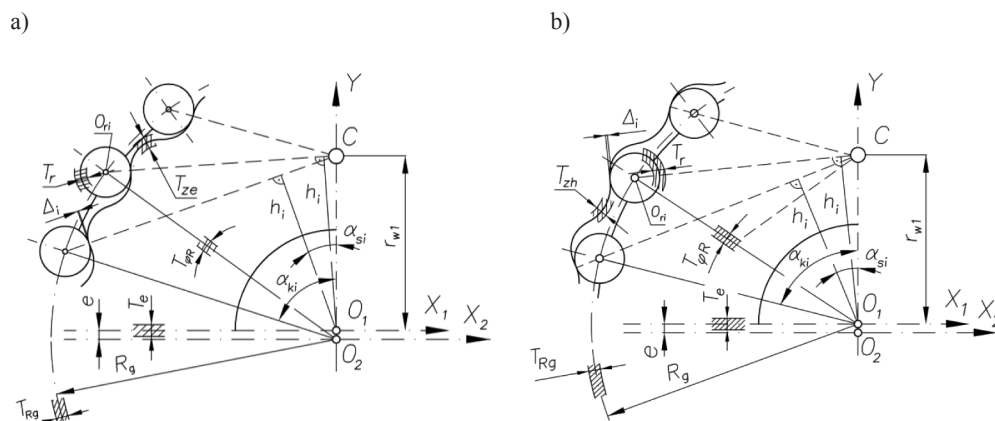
Gearing tolerances: a) epicycloidal, b) hypocycloidal
